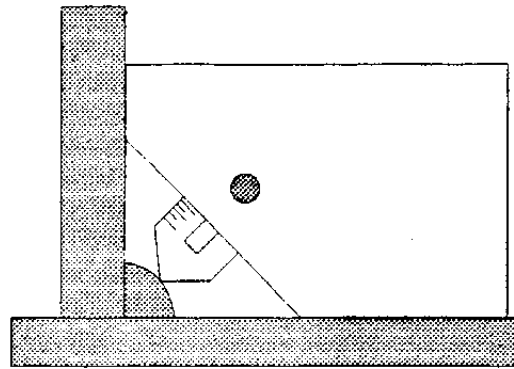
Measurement of Throat Thickness of a fillet weld
